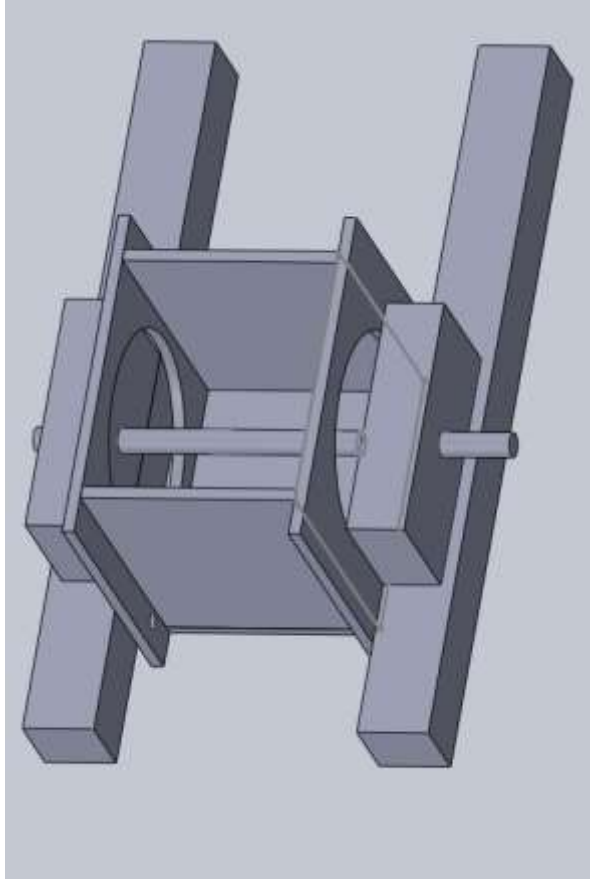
CAD Drawing of EM-Heater without the aluminum pipe.
